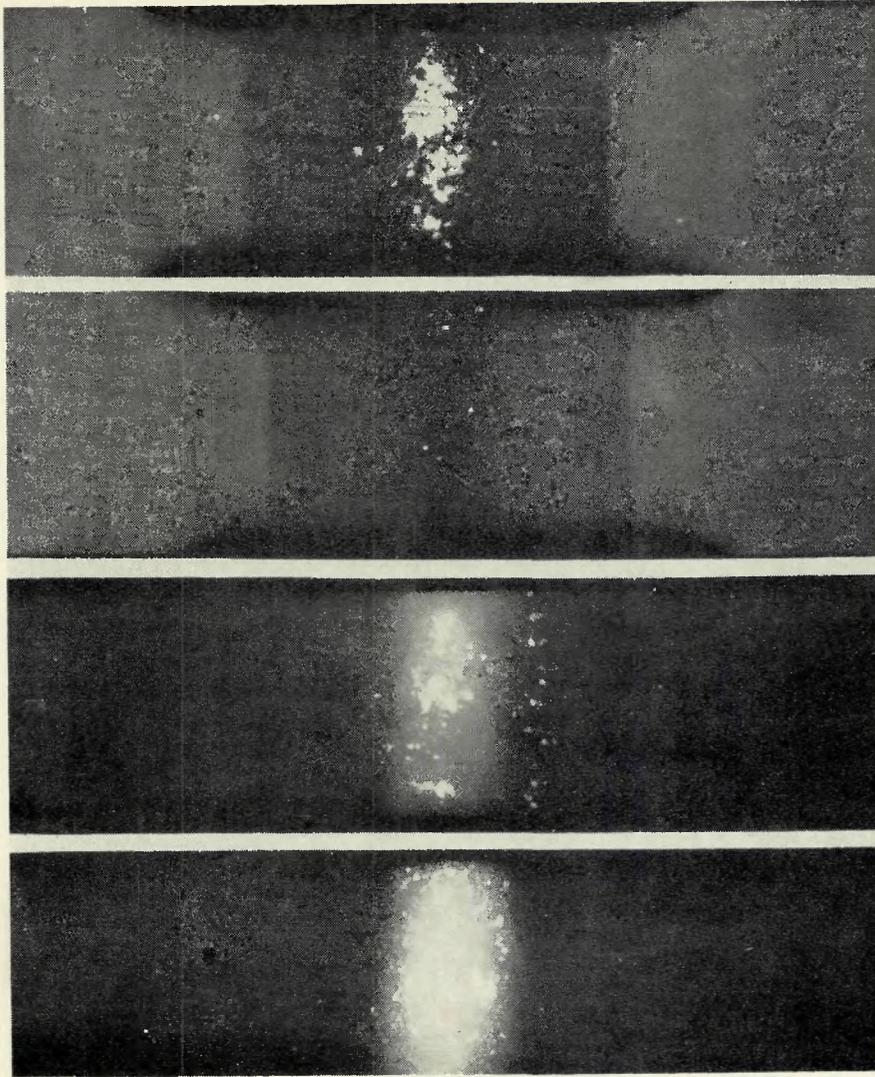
Radiographic image of a 1100 weld in a 1/2-in. thick 3003-F panel welded with the gas tungsten-arc method
